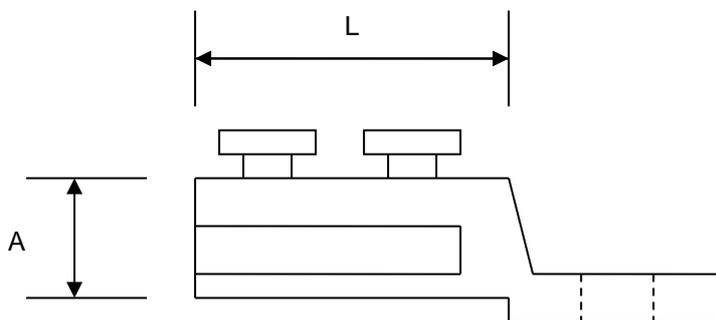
Typical arrangement of a mechanical torque shear connector lug
